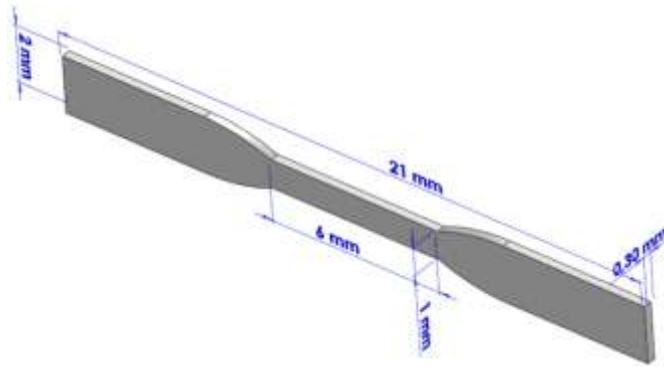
Nominal dimensions of tensile μ IM specimens.
